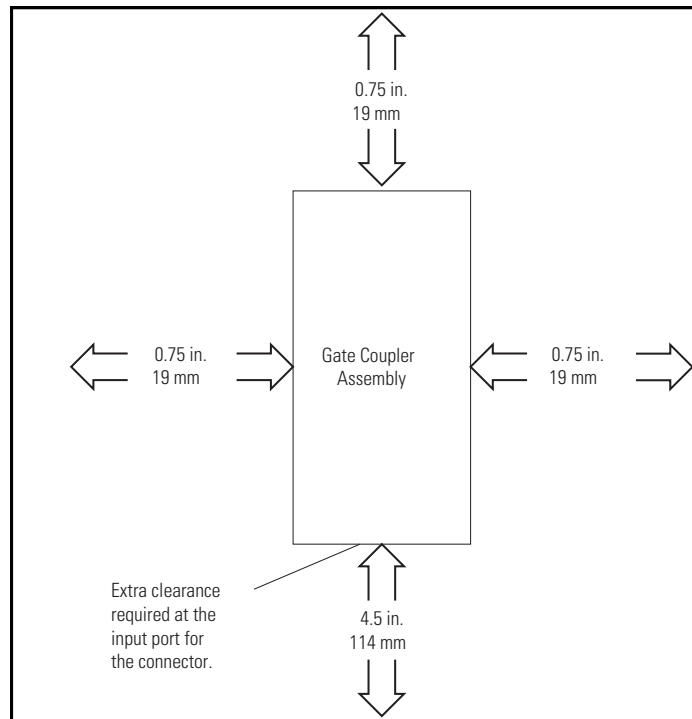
Gate Coupler Assembly Mounting Dimensions, Ground Terminal, and Input / Output Connections
